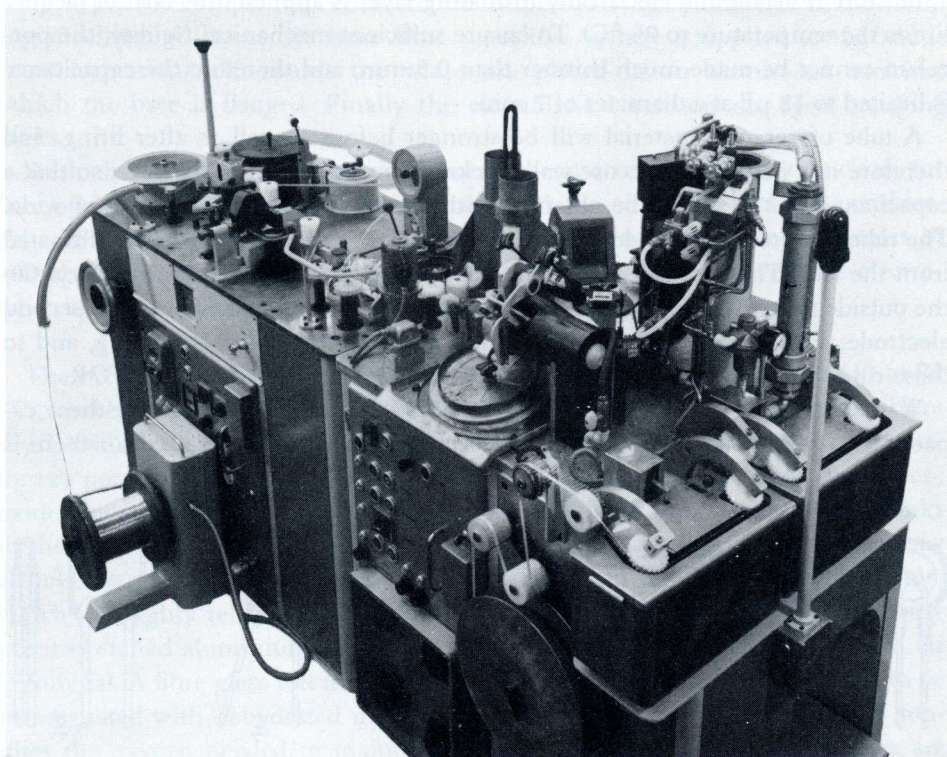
Automatic machine for assembling miniature disc type capacitors
